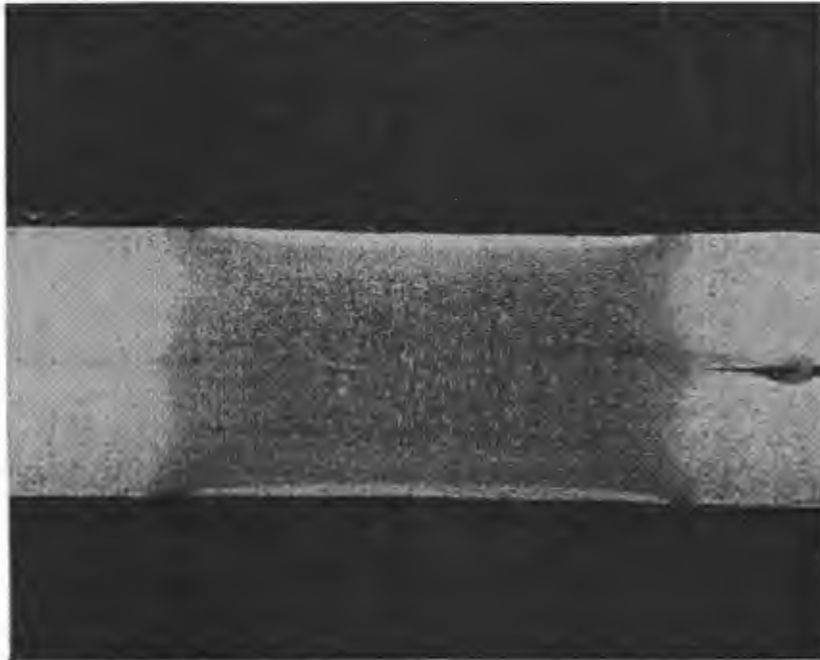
Cross section of a seam weld specimen etched with 1% nital etchant; magnified 10 $\times$ .
